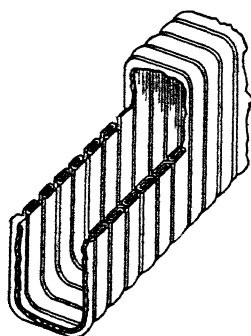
Wound Metal-hose Wave Guide (Courtesy McGraw-Hill Book Co.)
